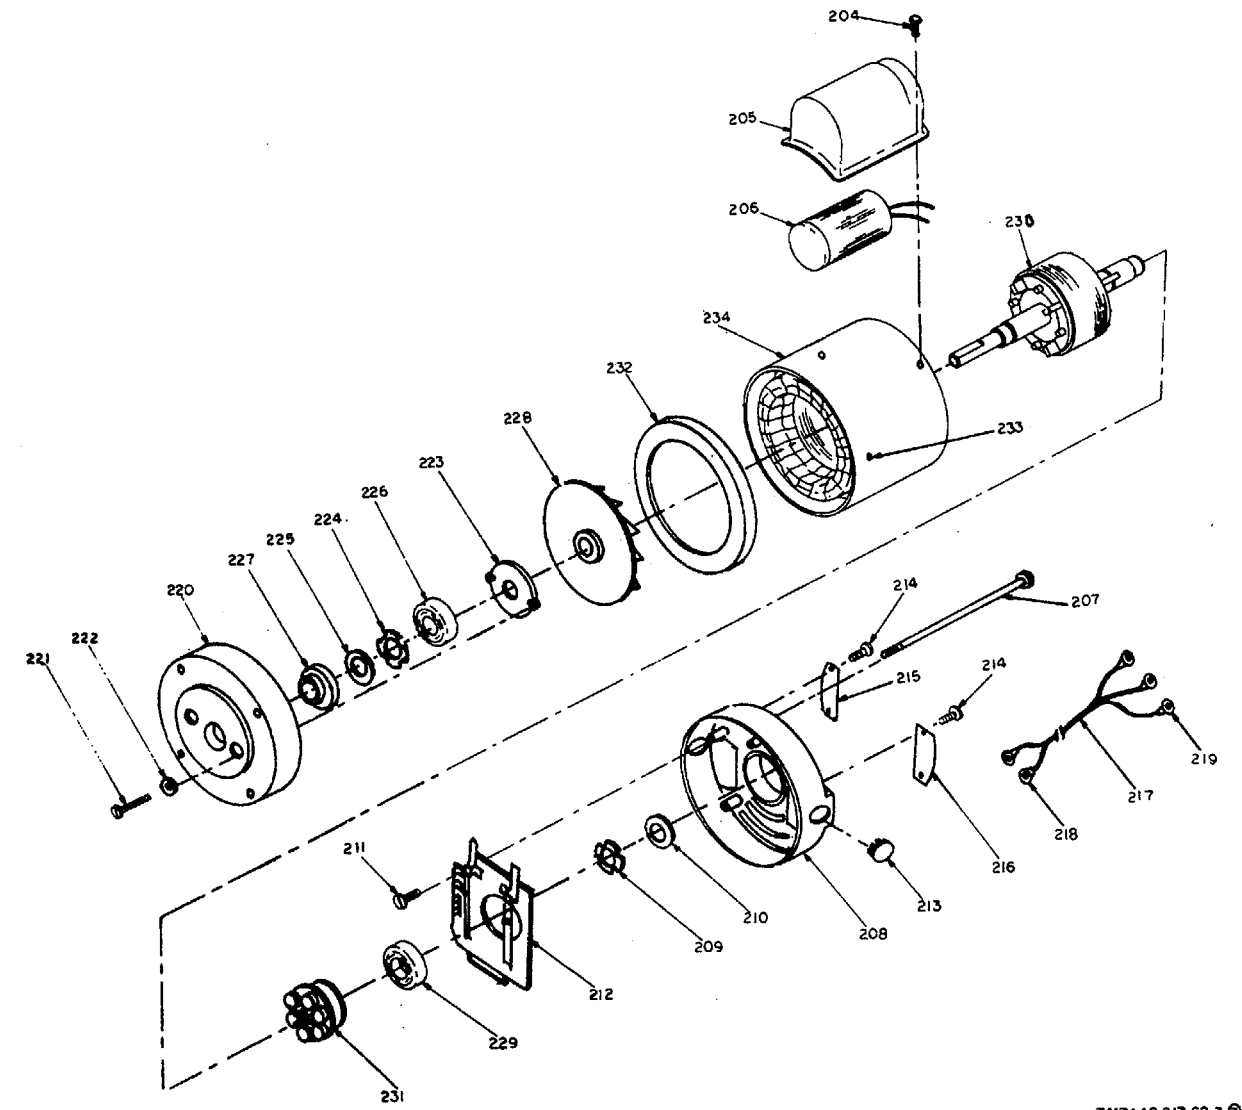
Punch head assembly, exploded view. (Part 3 of 3)
